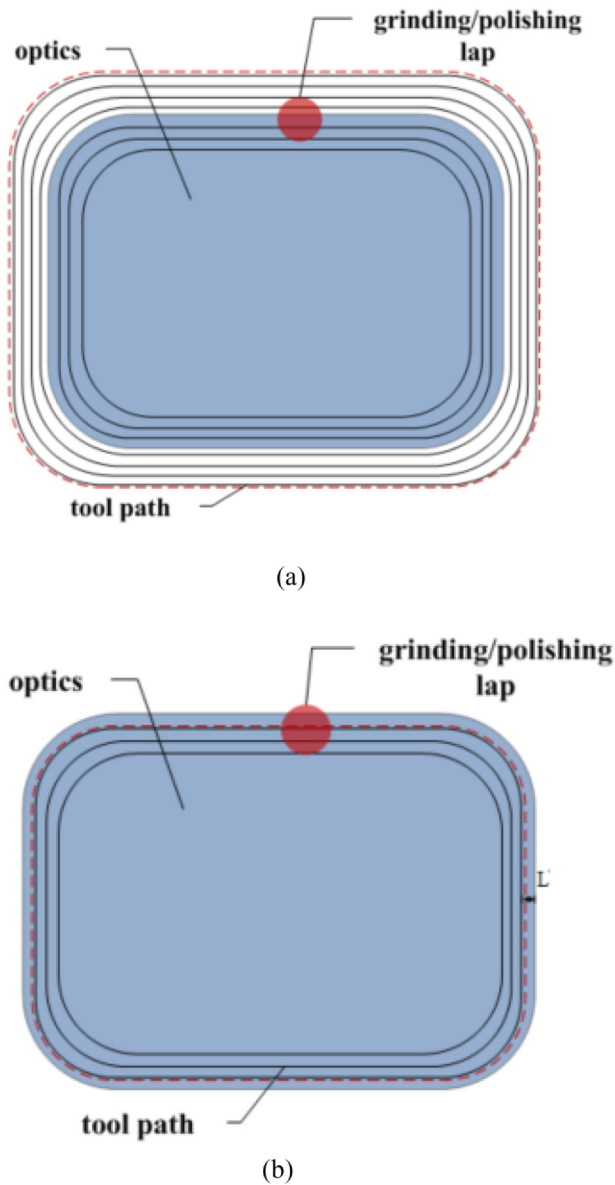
Tool path for small lap tool: (a) edge-area tool path outside optics, (b) safe edge-area tool path.
